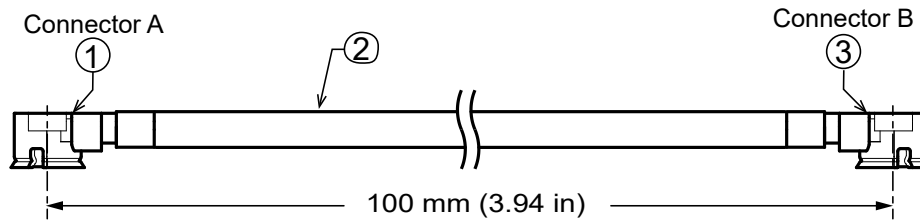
Product Dimensions for the CSG-UFFR-100-UFFR Cable Assembly
